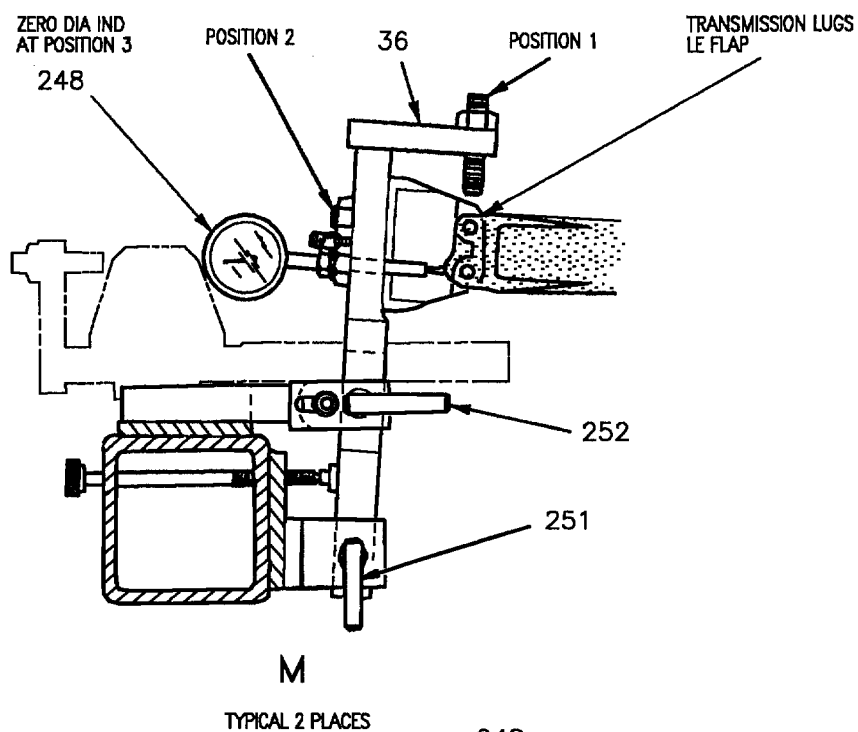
Installation of Flap with Damaged Bushings into Fixture (Sheet 7)
